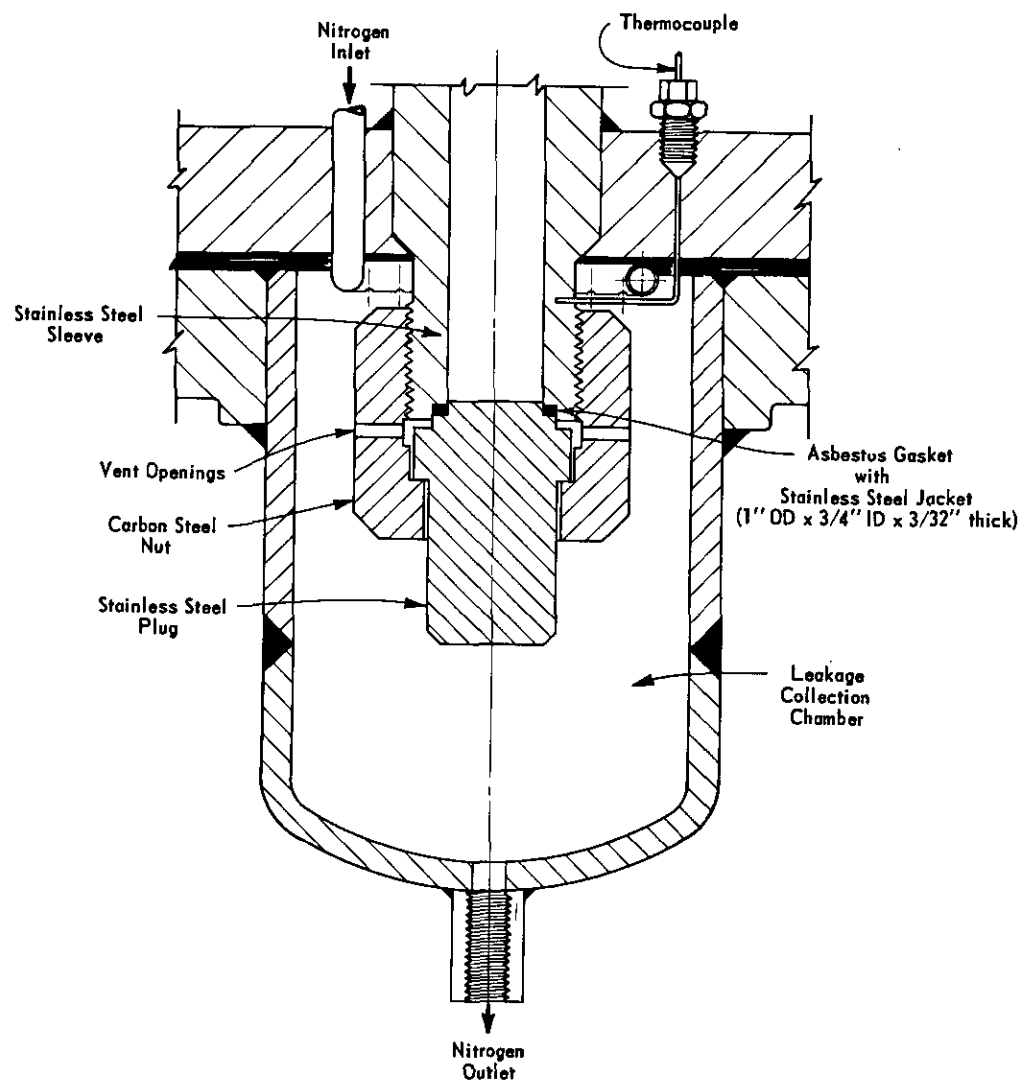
TEST ASSEMBLY OF GASKET FOR INSTRUMENT PIN JOINT
